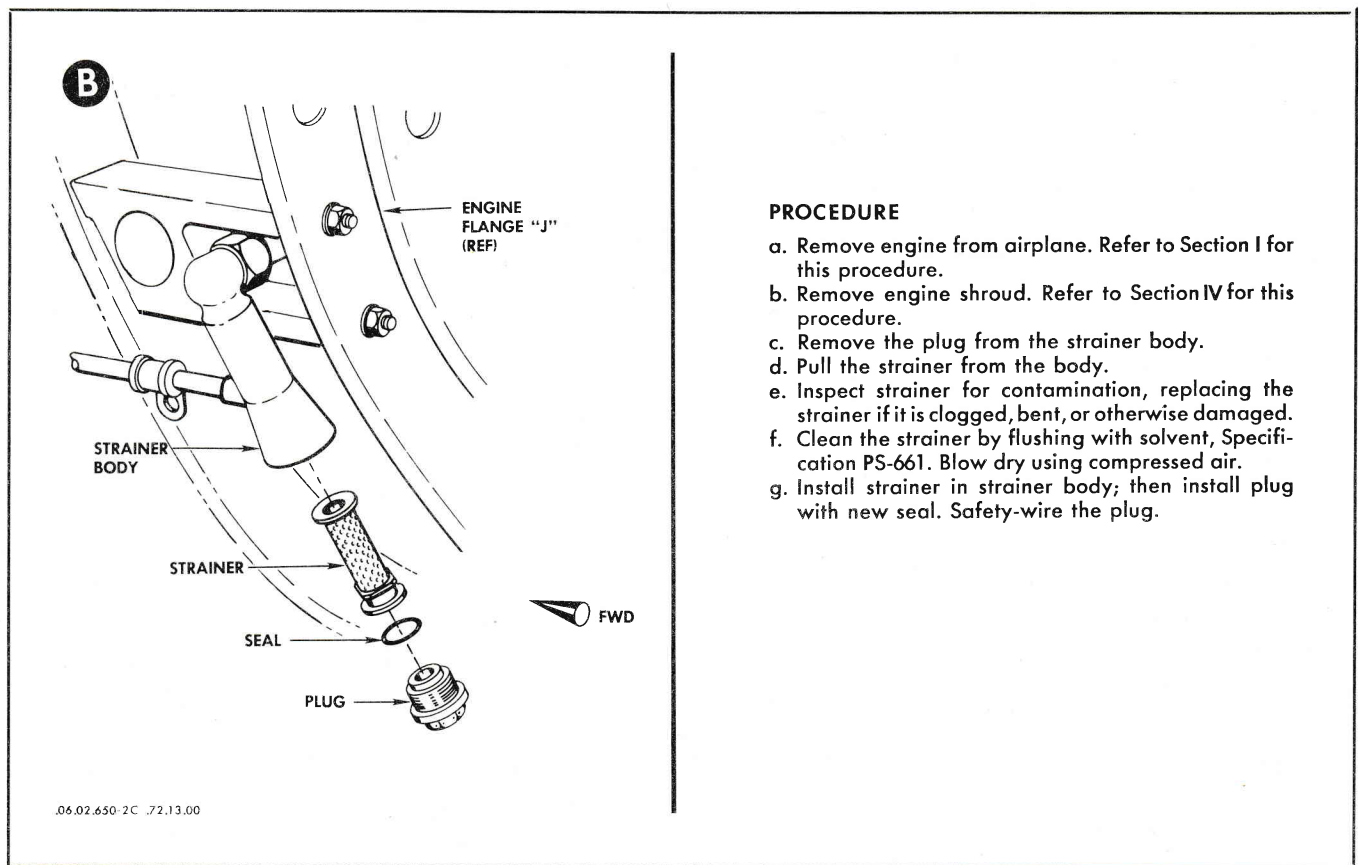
Cleaning, Engine No. 6 Bearing Oil Strainers (Sheet 2 of 2)
